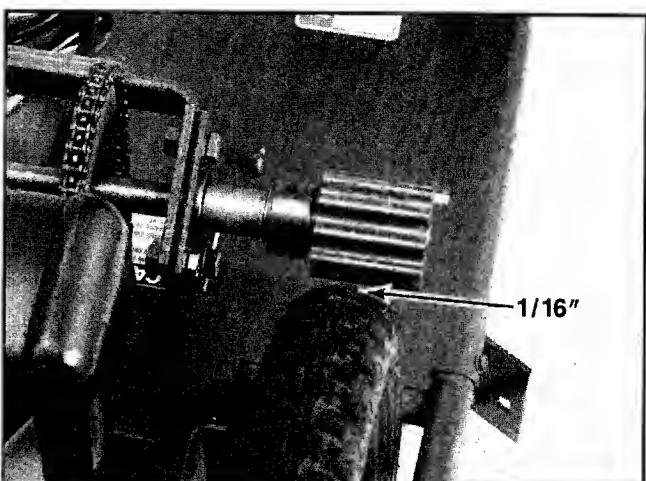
Check for minimum clearance of 1/16" between rollers and tires. (Belt/pulley safety cover removed for photo clarity.)
